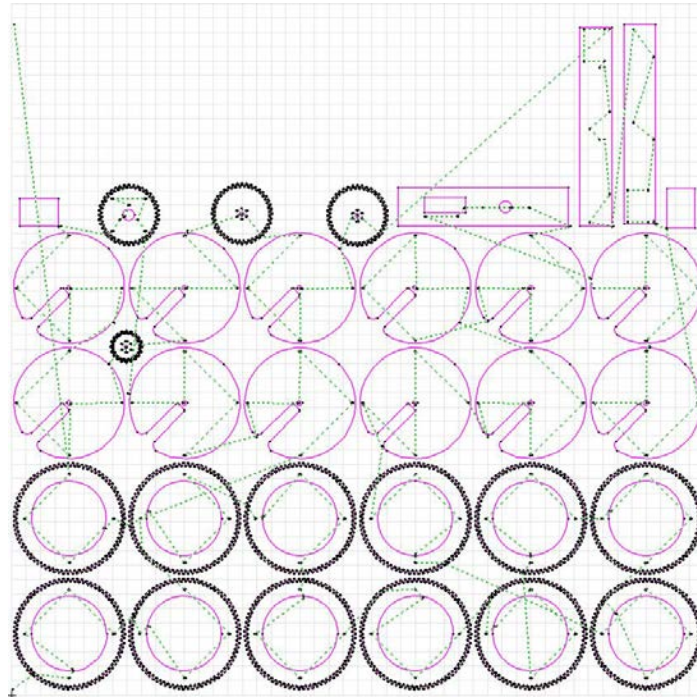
Water Jet Layout for 4'x4' sheet of aluminum
